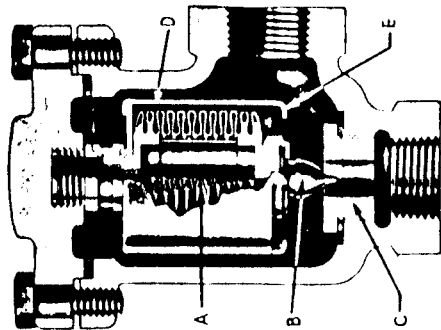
Sectional view of Sarco thermostatic steam trap for pressures up to 225 p.s.i. (Sarco Company, Inc.)
